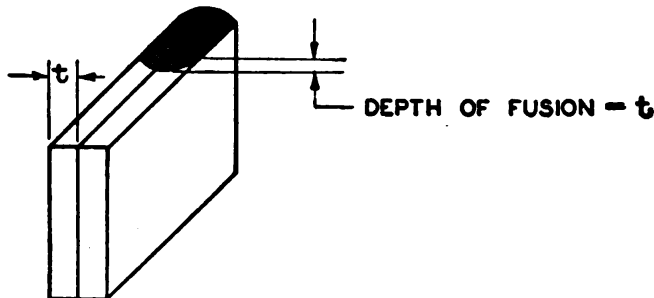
Weld metal specifications for edge welds.
